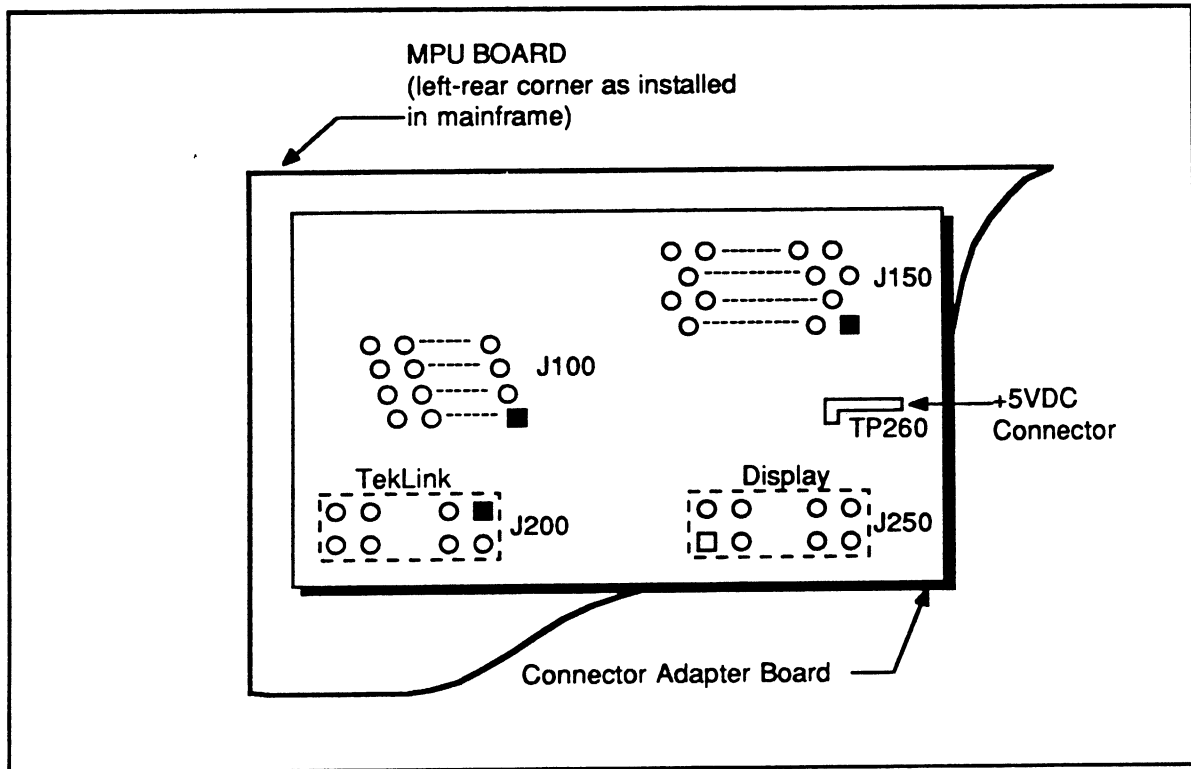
Connector Adapter board for 671-0058-50 MPU board.
